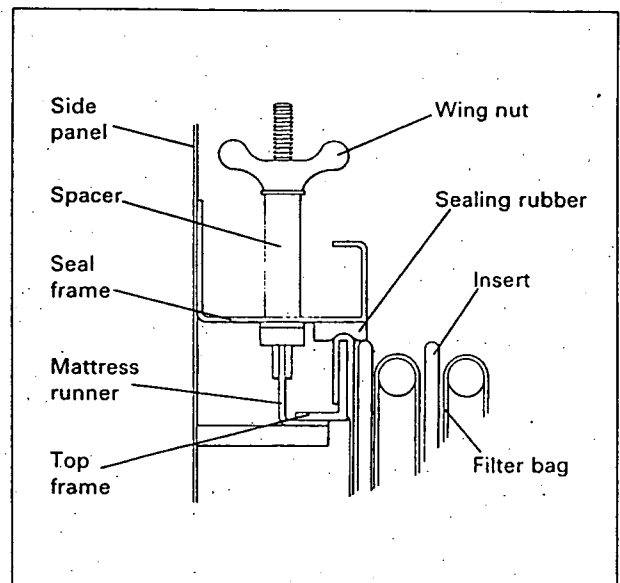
Filter assembly clamping arrangement for UMA 40-450
